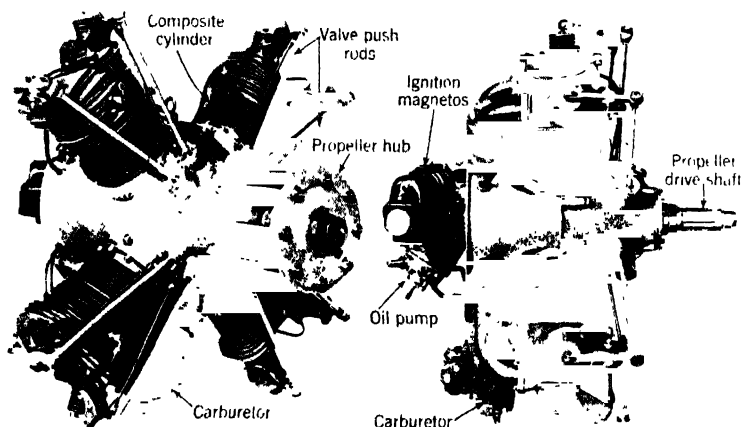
The View at A is the Fairchild-Camenz Engine Viewed from the Propeller End. Side View at B Shows Compactness and Simplicity of Assembly.
